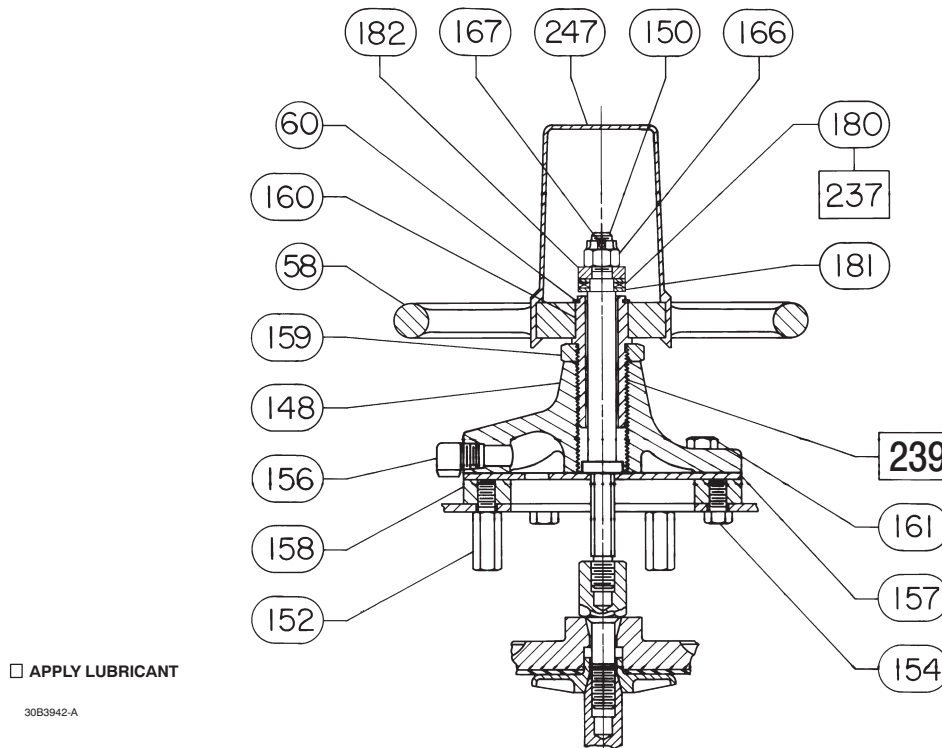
Top-Mounted Handwheel Assembly, Style P2 for Size 45, 50, 60, and 76 Actuators
